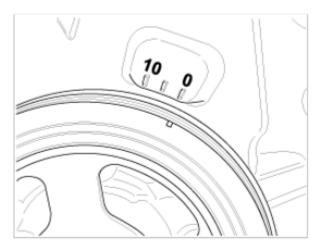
Identifying Crankshaft Pulley Installation Position Courtesy of HYUNDAI MOTOR AMERICA
